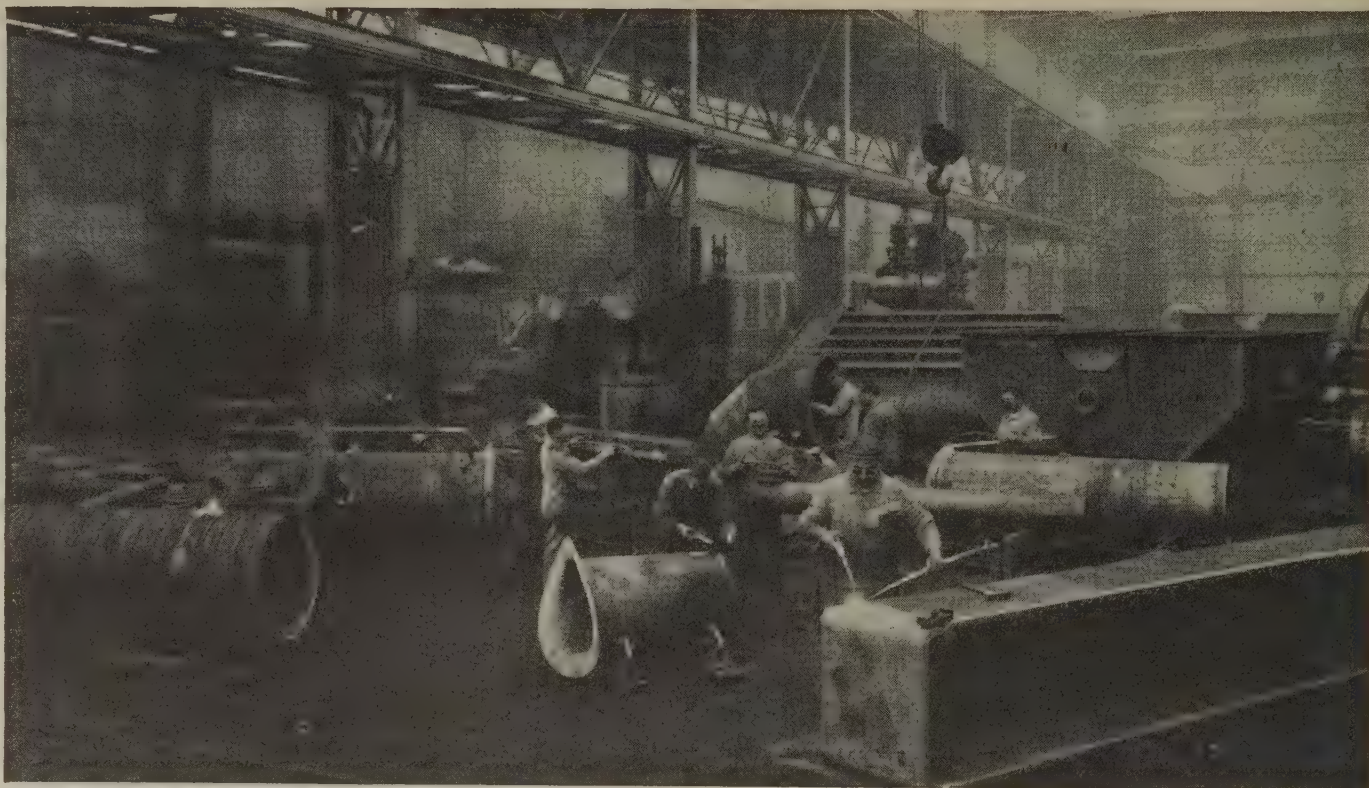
Oxy-Acetylene Welding on Heavy Plate Work in Sulzer Brothers Shops, Winterthür, Switzerland
